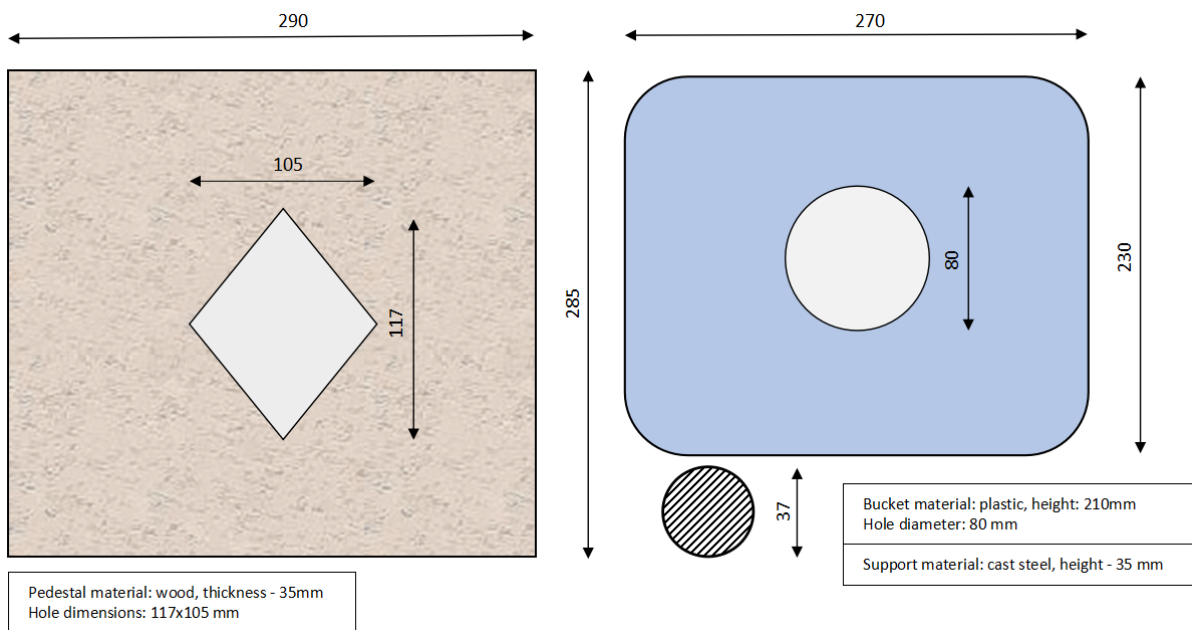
Used tools dimensions: left – wooden pedestal, bottom right – steel support, right top – plastic bucket
